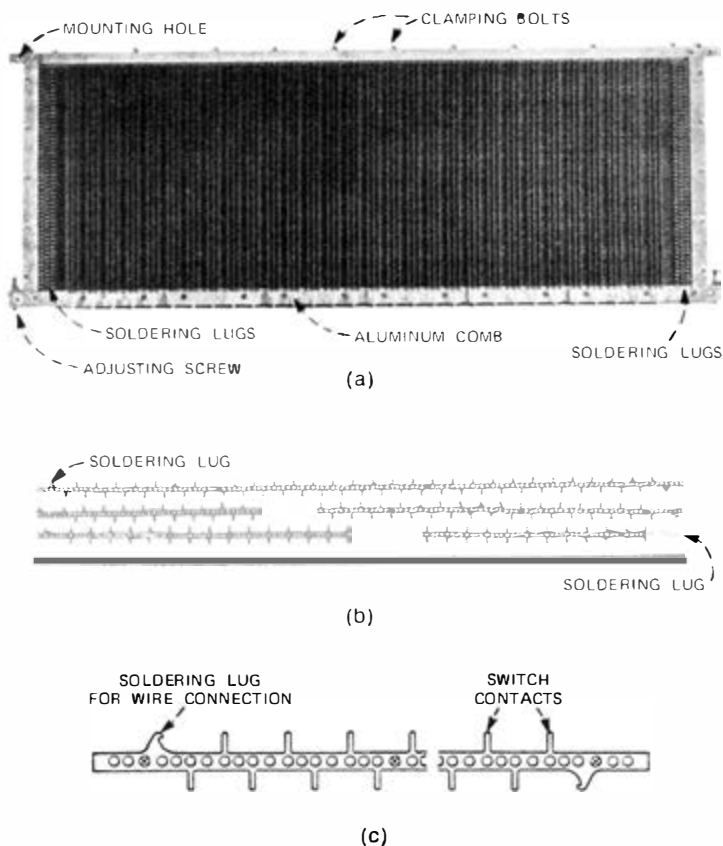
Panel bank details: (a) assembled bank; (b) set of punchings; (c) detail of a punching.
